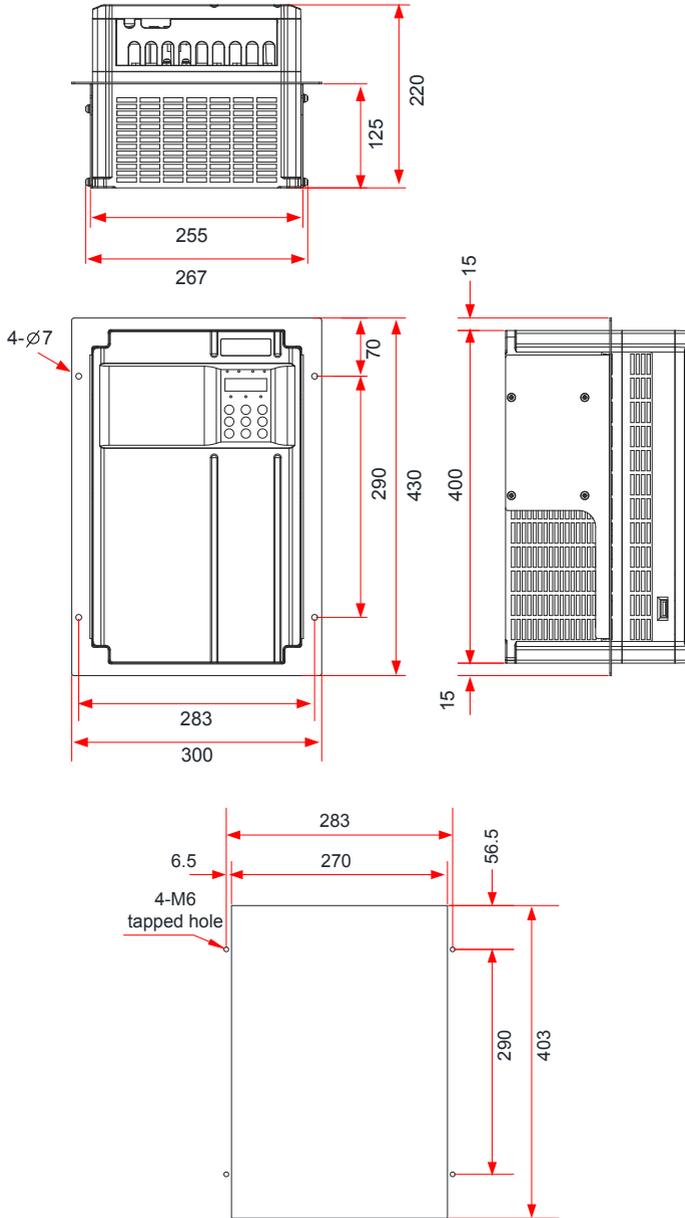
Intermediate mounting bracket dimensions and hole spacing for 30-37 kW AC drive models
